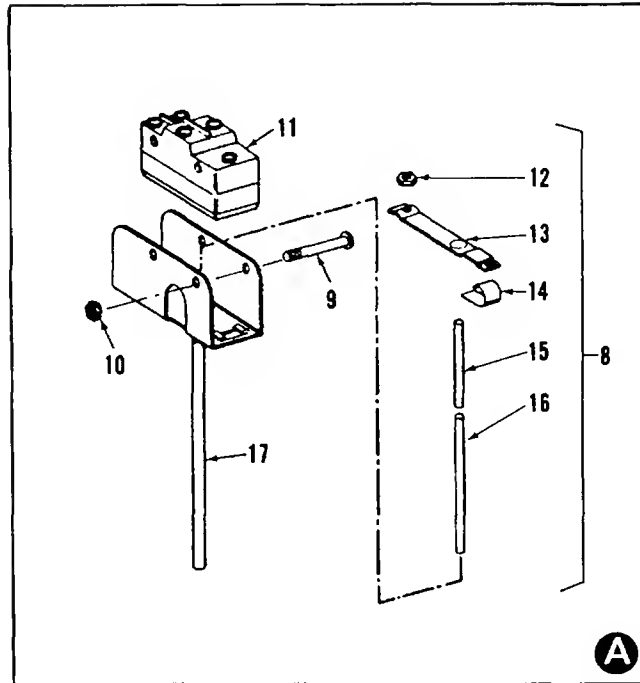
Fuel Burning Winterization Kit Heater, Exploded View (Sheet 2 of 3)
